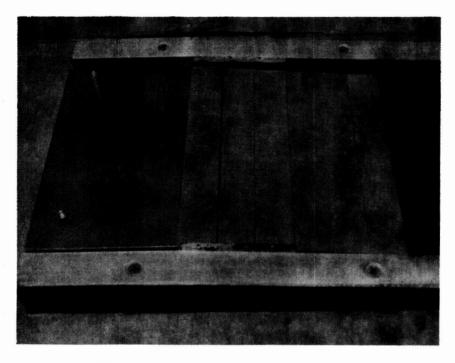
End of Skin Tool Showing All Titanium Details in Place
